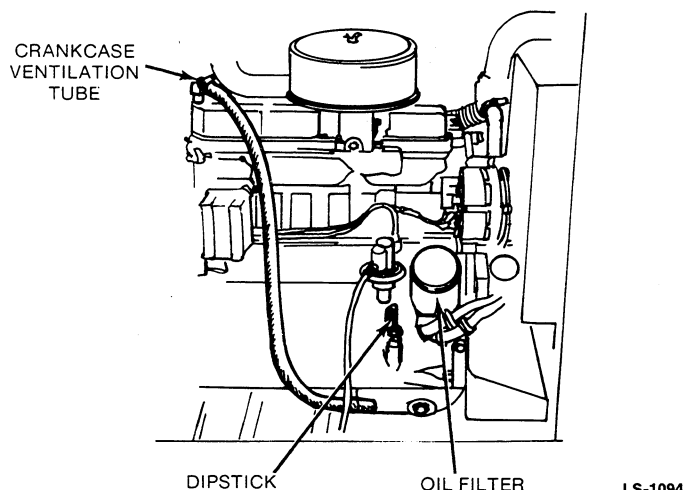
LOCATION OF OIL FILTER, DIPSTICK AND CRANKCASE VENTILATION TUBE
